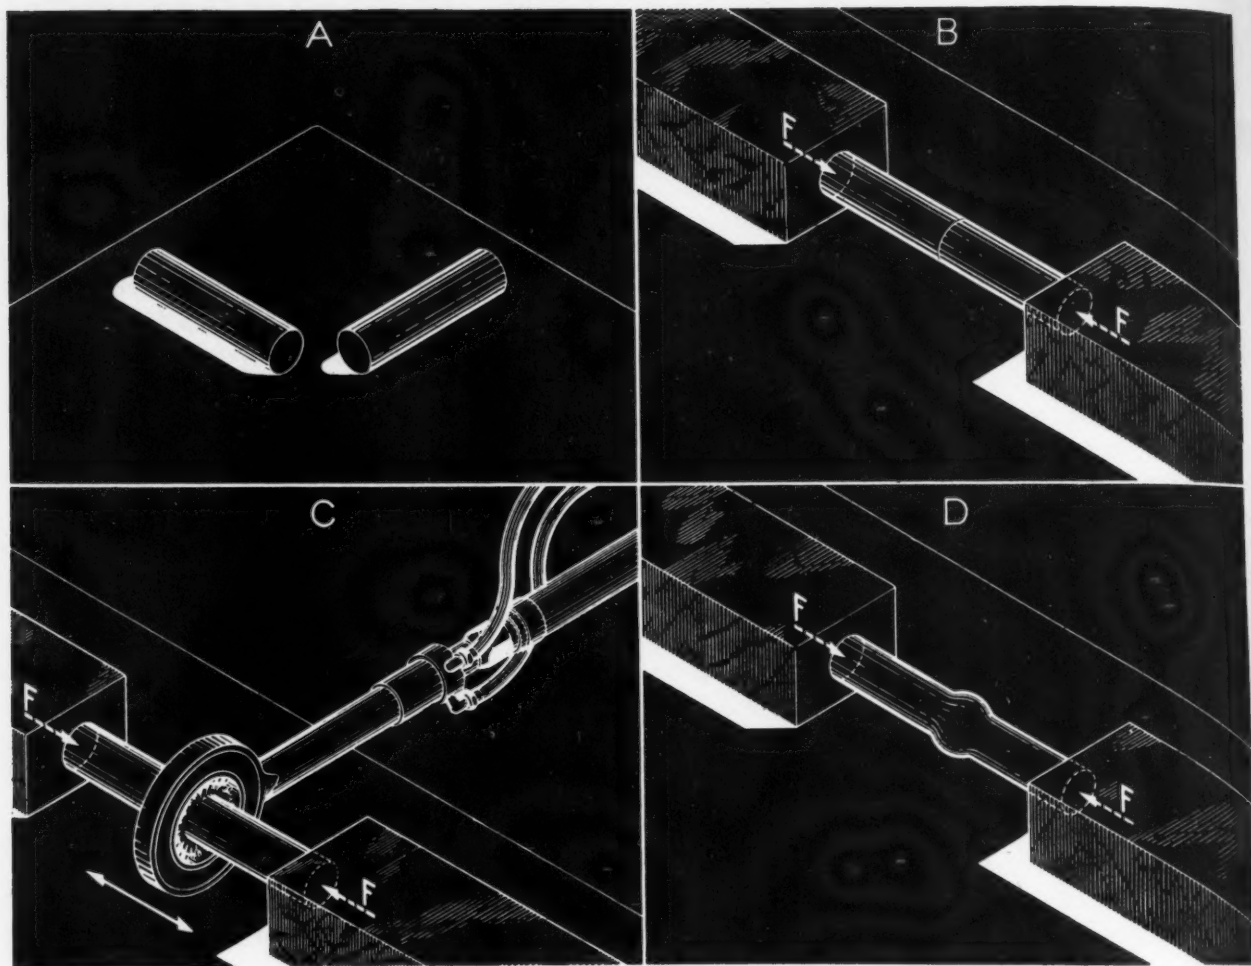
Diagrams Indicating the Successive Steps in Oxy-acetylene Pressure-welding Operations in which the Two Work-pieces to be Welded are Heated by Oxy-acetylene Flames to a Temperature of About 2100 Degrees F. and Pushed together to Effect the Welding
